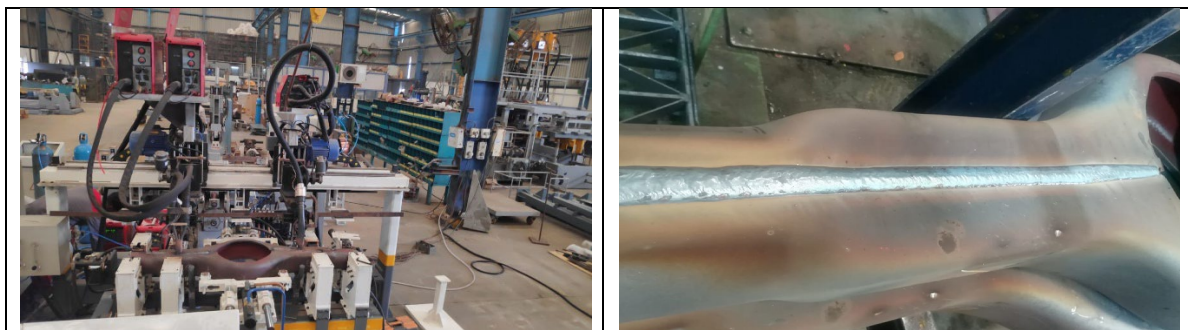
Welding of axle carriers for commercial vehicles, factory photo from “Axles India”
